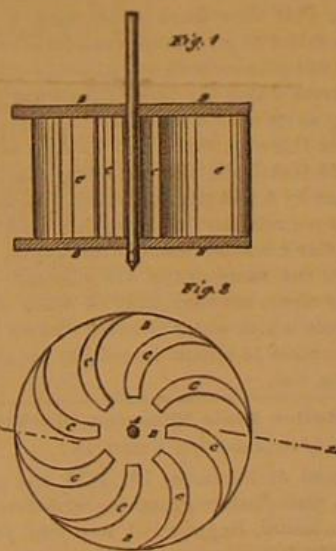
shows a cross section of the wheel, taken through the line, x x, in Fig. 2. Fig. 2 is a top view, with the cover removed. A represents the shaft to which the wheel is attached, the lower end of which is designed to revolve in a step in a simple frame secured in the bed of the stream. The upper end of the shaft is designed to extend above high water mark, and with it is connected the gearing to give motion to the machinery to be driven. To the shaft, A, at suitable distance apart, are secured two disks, B, between which the buckets, C, are placed, and to which the upper and lower edges of said buckets are attached. The buckets are vertical, are thicker at their inner ends, taper to an edge at their outer ends, and are curved, as shown in Fig. 2. The inner ends of the buckets, C, do not extend quite to the center of the shaft, so as to leave a clear space around the shaft, A. With this construction, the water will enter at one side of the wheel, and escape at the other side, giving it an impulse both times, and will rotate the said wheel in the same direction, in whatever direction it may be flowing.
